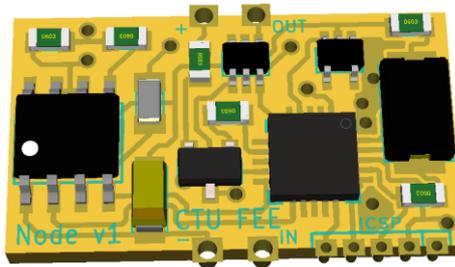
3D visualization of sensor's prototype PCB
